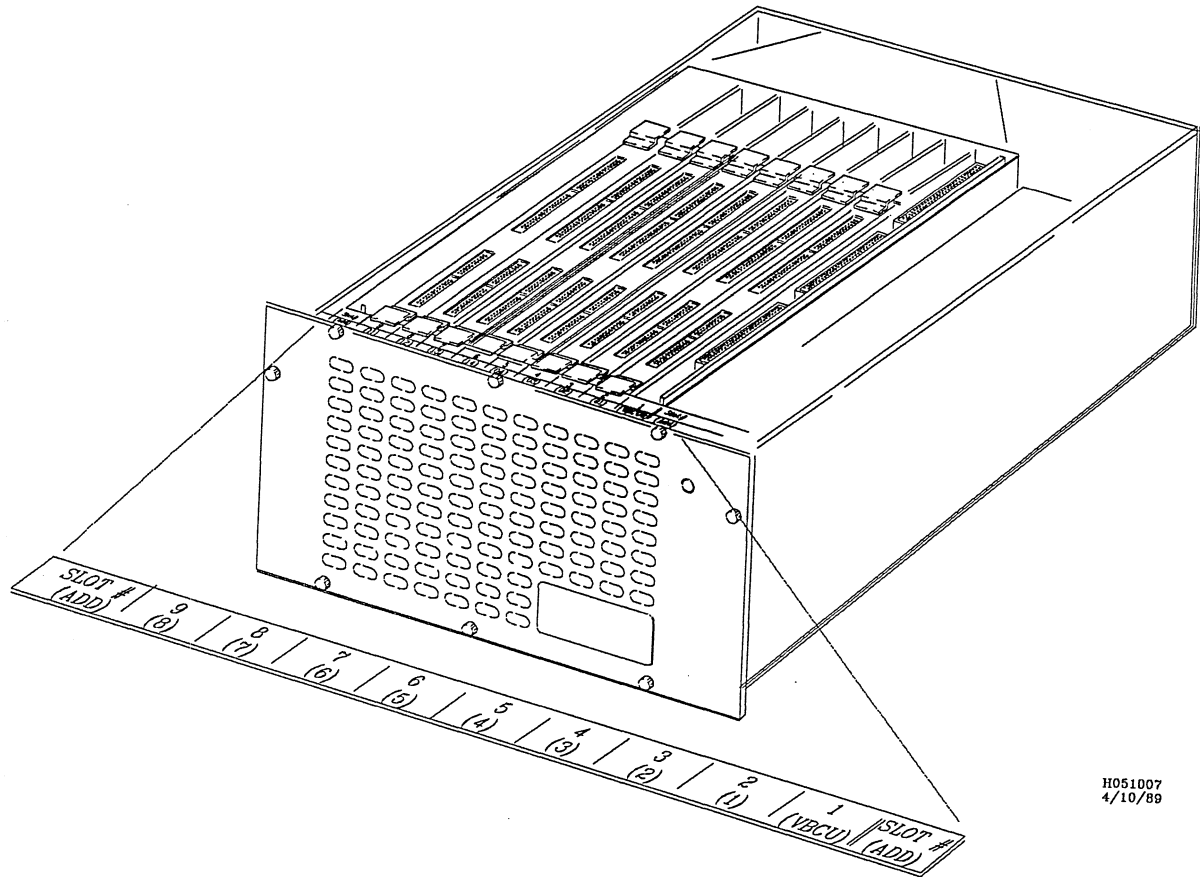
, VMEbus/Mbus Combo Chassis Assembly
